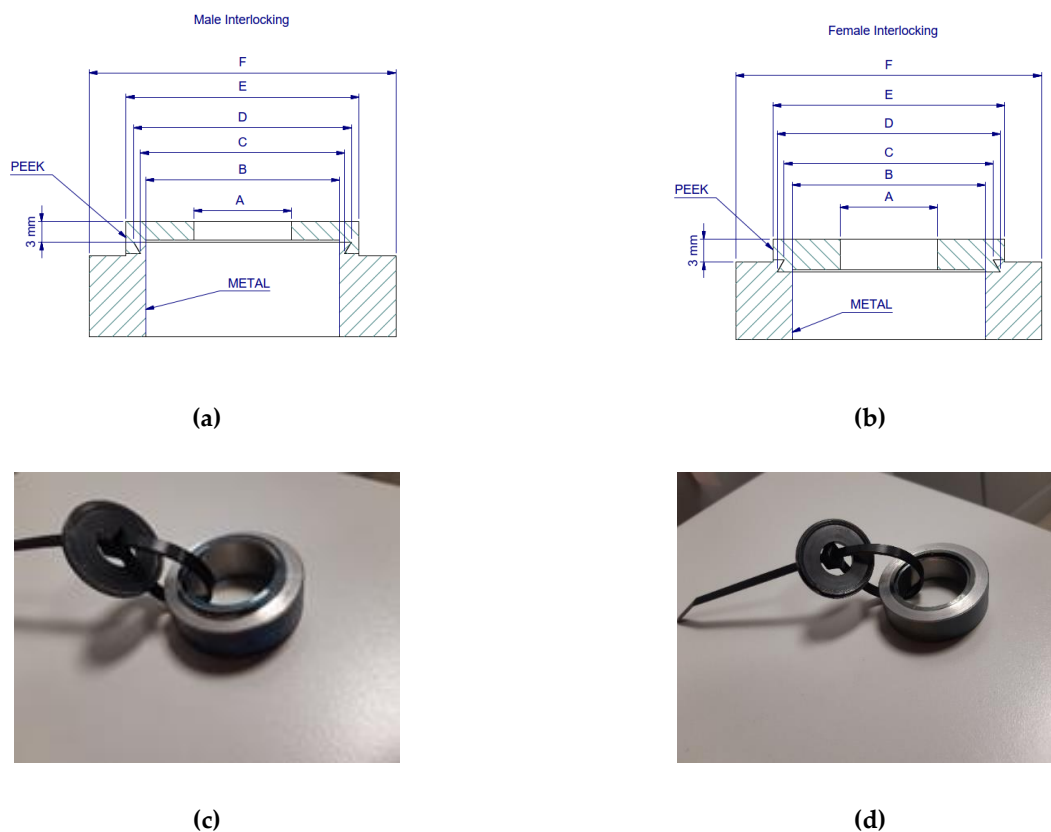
Male and female interlocking for the specimens: (a,b) drawings, (c,d) samples.
